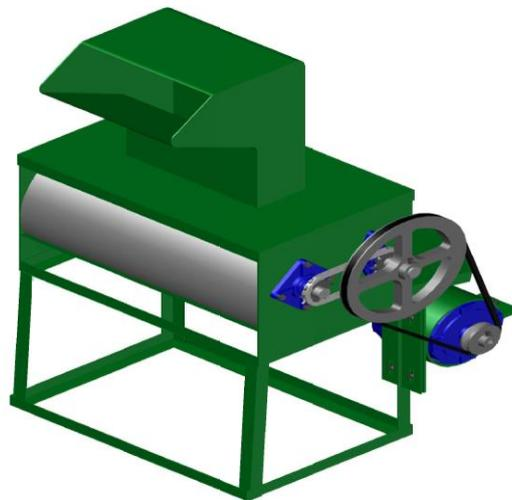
Isometric Modeled View of Groundnut Decortiating Machine
